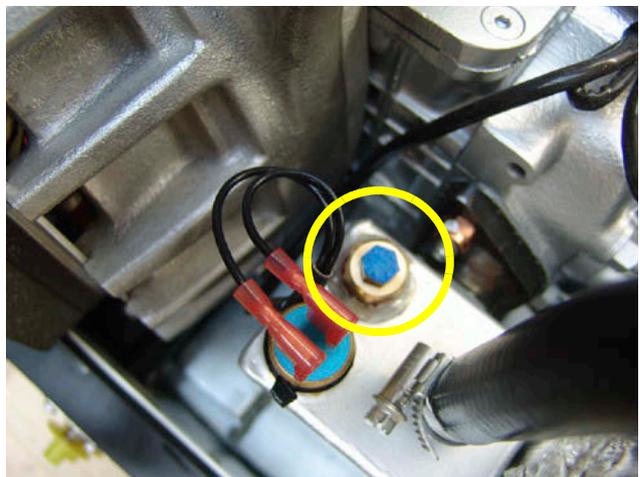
Ventilation screw exhaust elbow
